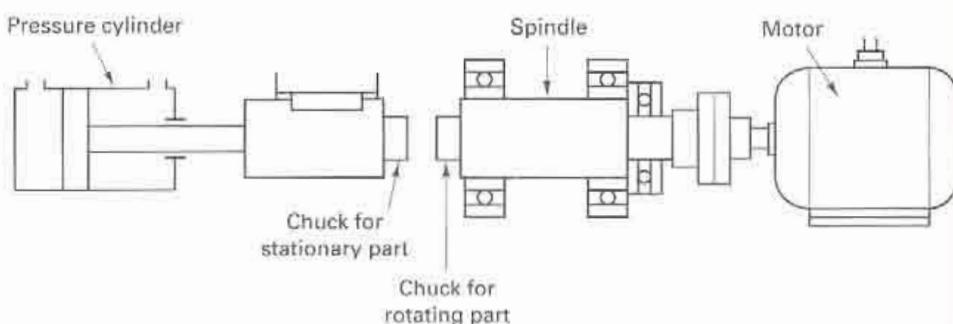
Schematic diagram of the equipment used for friction welding. (Courtesy of Materials Engineering.)
